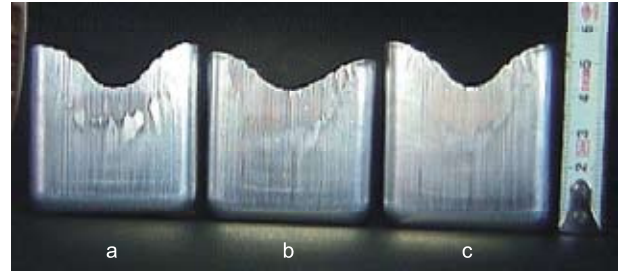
Comparison of cup heights and limiting drawing rates (LDR): a) With normal blank holder, blank diameter of 113 mm, LDR 2,33, b) with multi-point blank holder, blank diameter of 113 mm, LDR 2,33, c) with multi-point blank holder, blank diameter of 116 mm, LDR 2,39
